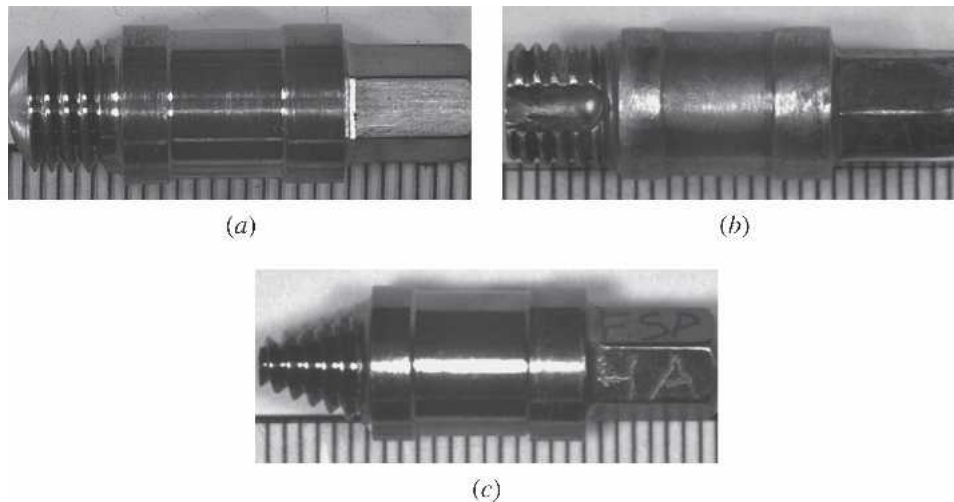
Pins used for FSP: (a) standard pin, (b) triflute pin, and (c) cone-shaped pin.
